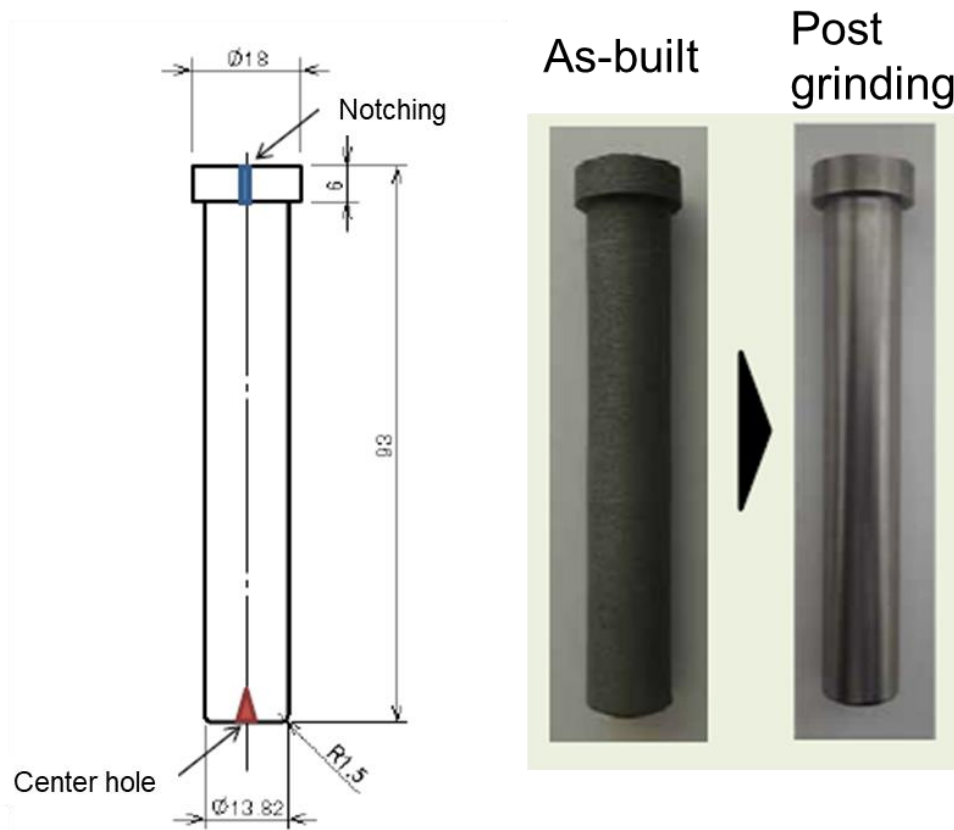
Appearance and drawing of the mold fabricated by the LPBF method.
